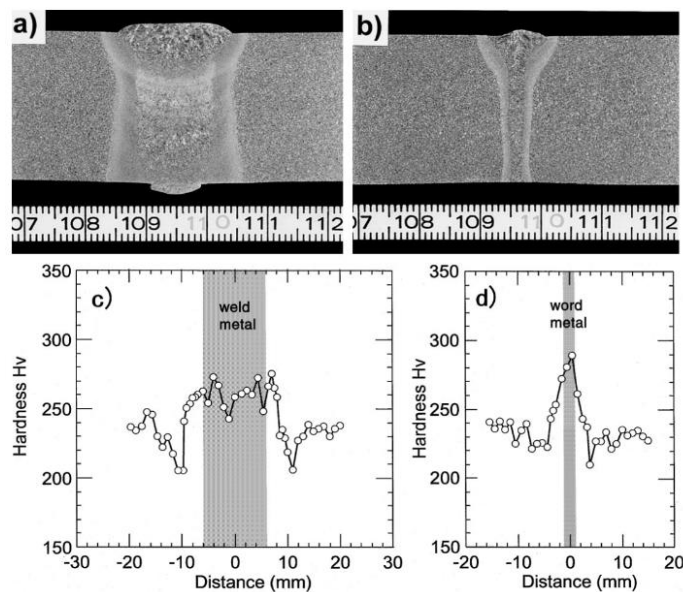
Cross sections of TIG(a) and EB(b) welded F82 plates and hardness distributions on TIG weld joint(c) and EB welded joint(d) [76]
